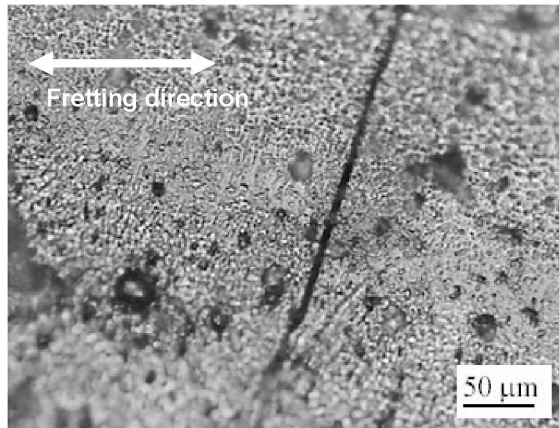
Cracks on the surface of PVD TiN coated fatigue specimen.
